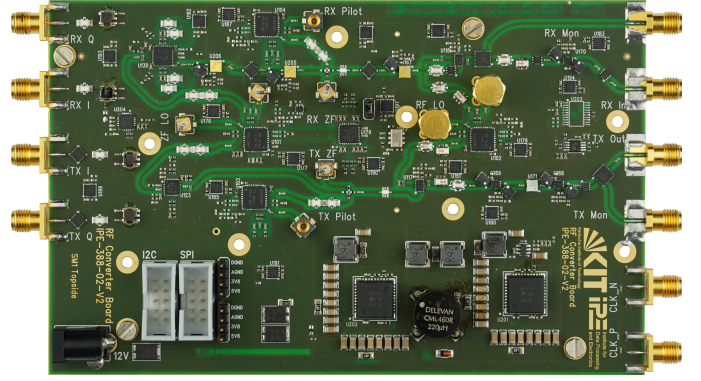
Picture of the finished printed circuit board assembly. BB inputs are on the left with RF and clocks supplied on the right hand side.
